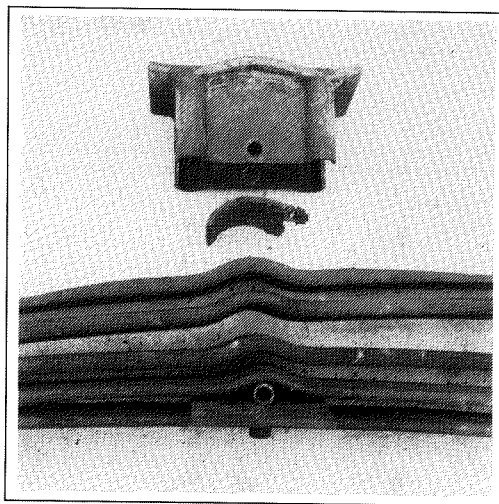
Spring clamp box disassembled. Note the typically worn rubber pad and how most of the wear is on one side — the drivers side!
